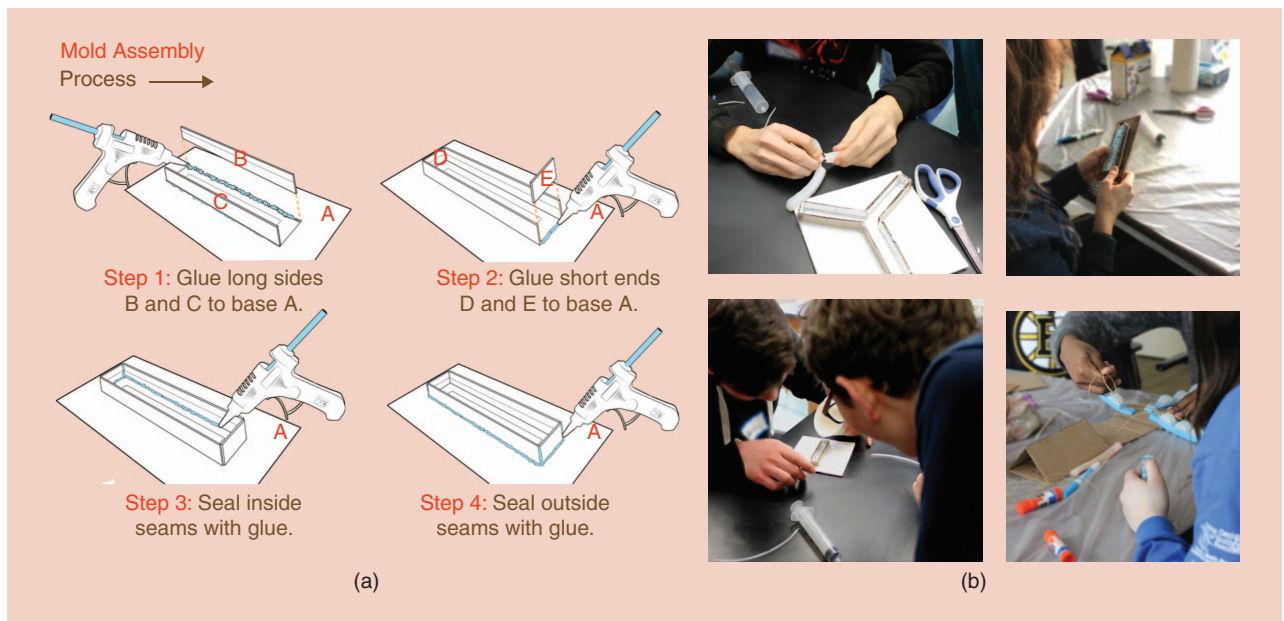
The methods of disseminating the new manufacturing techniques. (a) An extract from an illustrated instruction manual describing the assembly of the low-cost mold. (b) The middle and high school students using the new manufacturing technique to build their own soft robotic devices.
